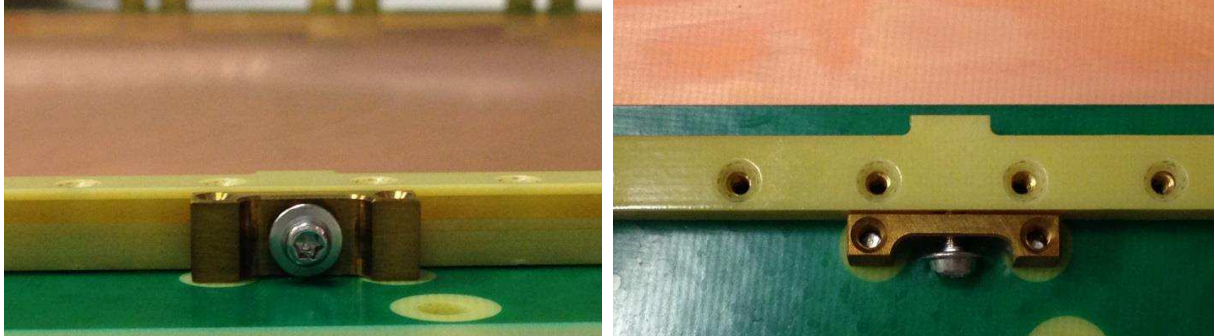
Brass pull-out with screw inserted into inner frame for tensioning the GEM foils in the stack in side view (left) and top view (right).
